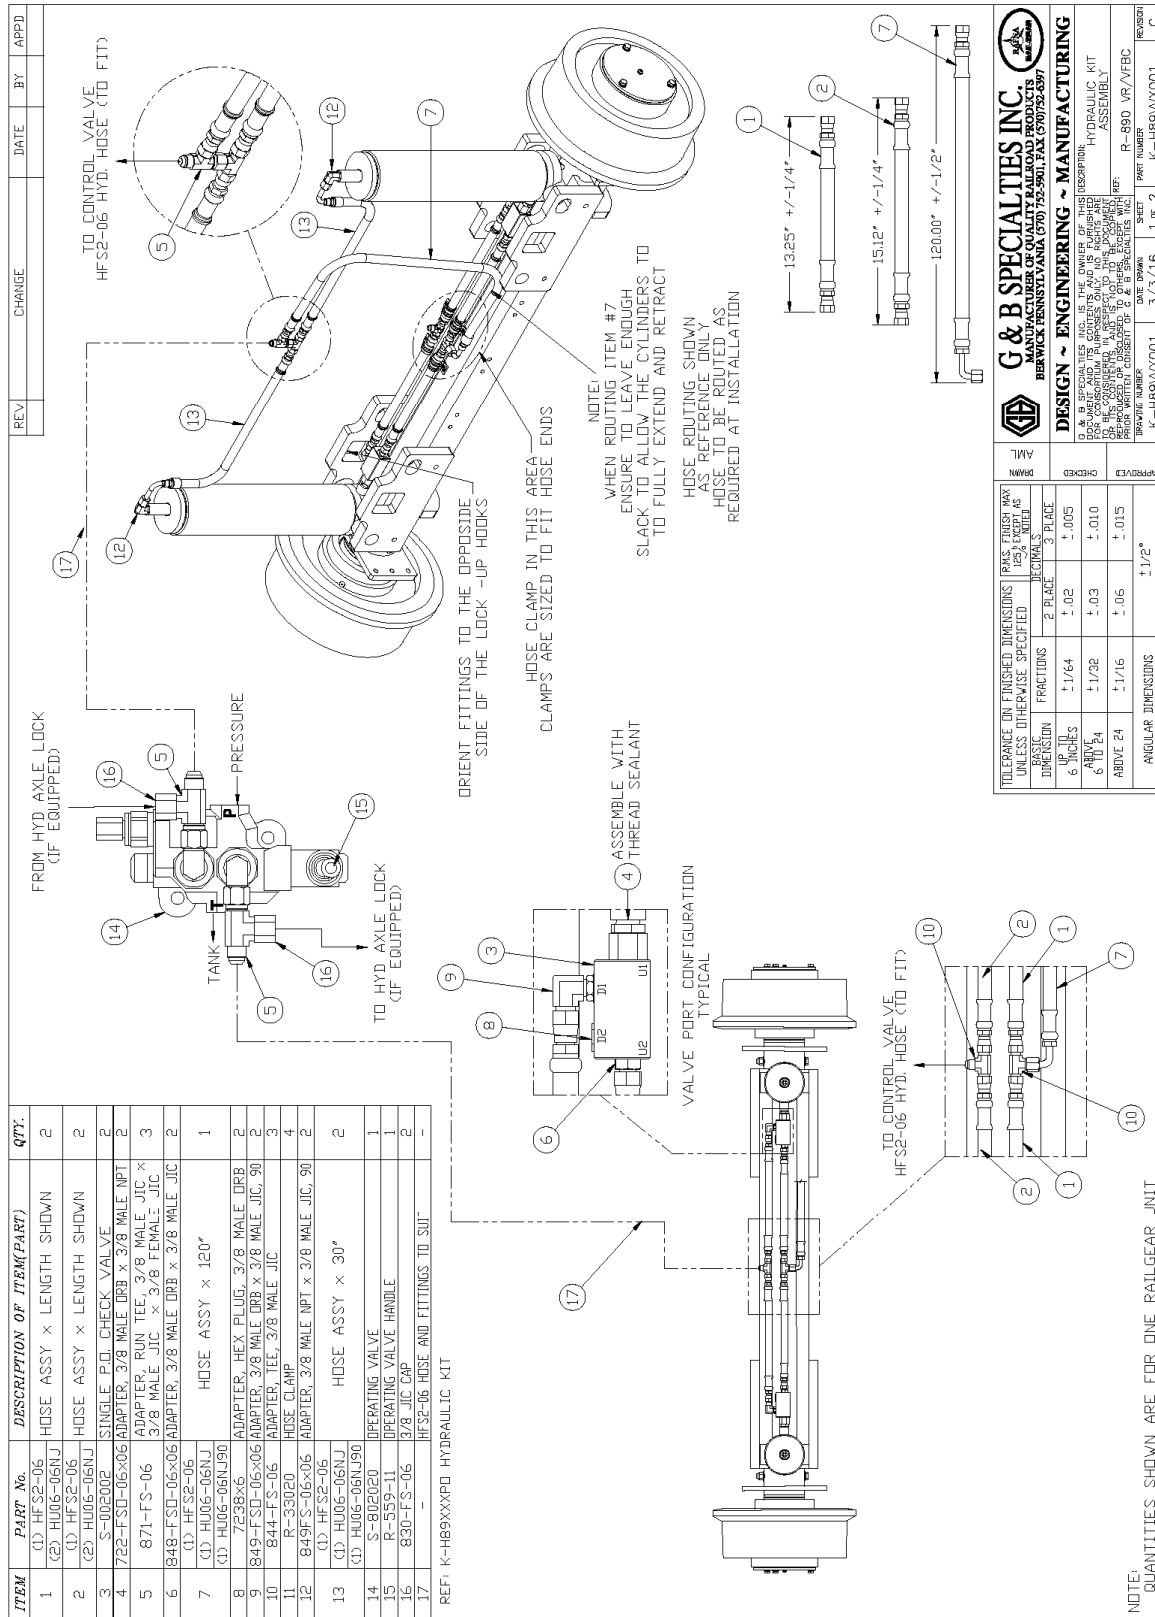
REF: PORT MOUNTED EXTERNAL P.O. CHECK VALVE
